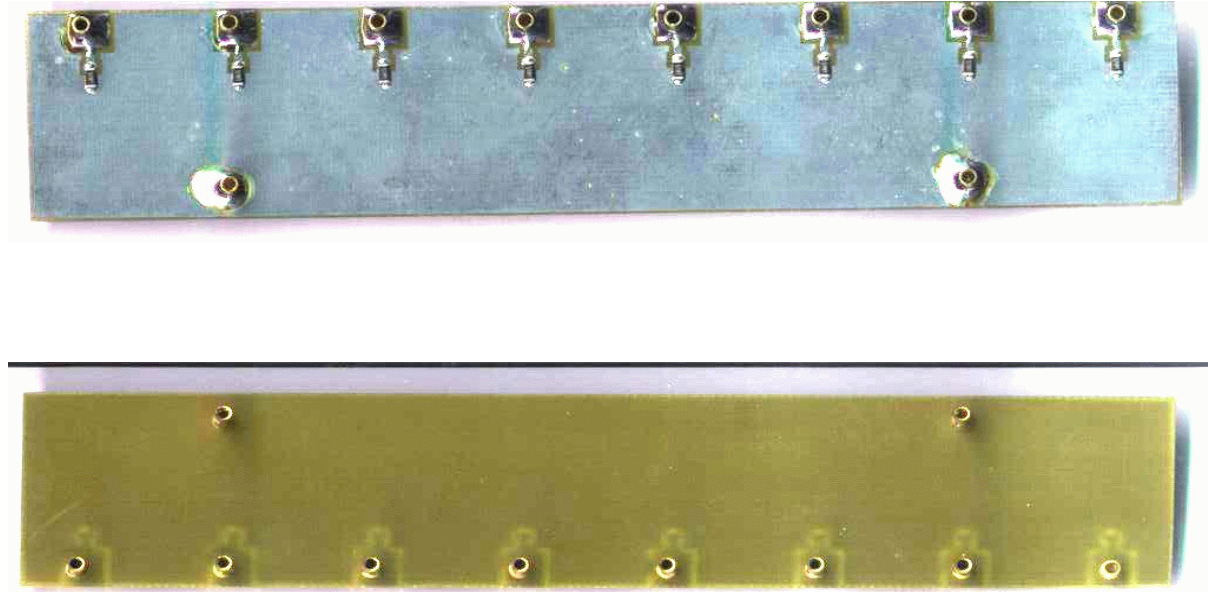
Adaptation board (50Ω resistor) with 8 strip connectors (2 cm pitch) and 2 ground connectors: top view (upper picture) and bottom view (lower picture).
